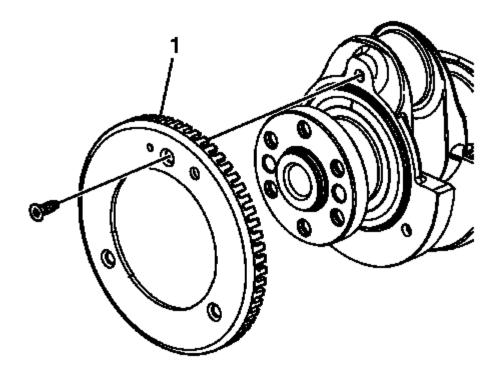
Crankshaft Position Reluctor Ring Courtesy of GENERAL MOTORS COMPANY
